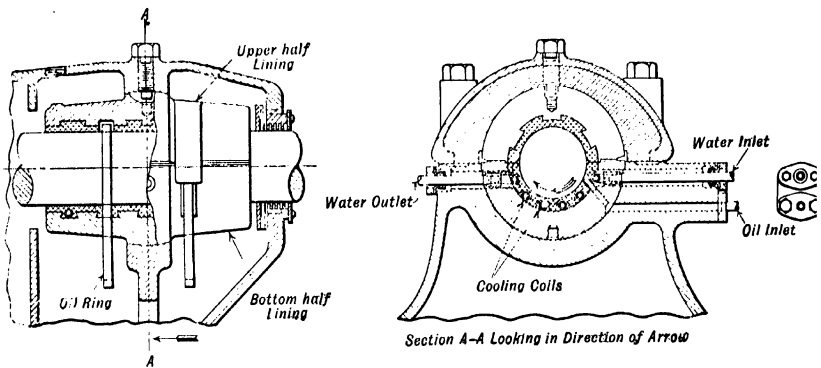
Section through Inner Bearing Curtis Turbine — Water Cooled.
